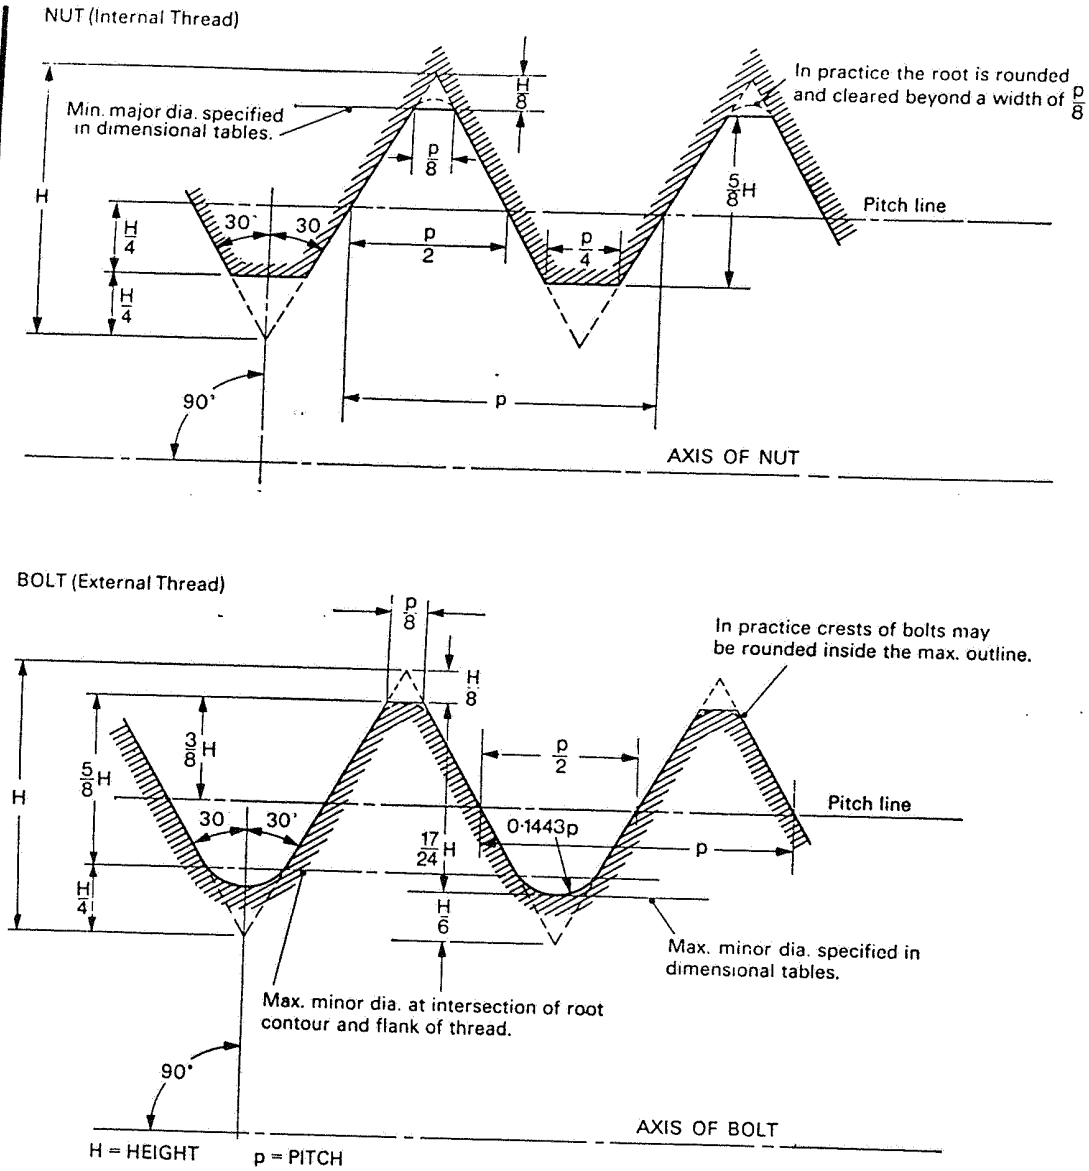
DESIGN FORM OF UNIFIED THREAD (MAXIMUM METAL CONDITION)
